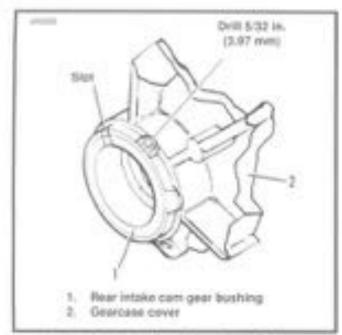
Floor Intake Corn Gear Bushing Installed in Gearcase Cover
